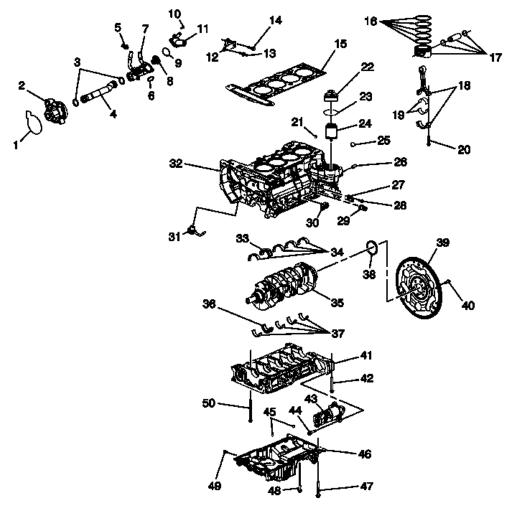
Exploded View Of Engine Block And Components Courtesy of GENERAL MOTORS COMPANY
